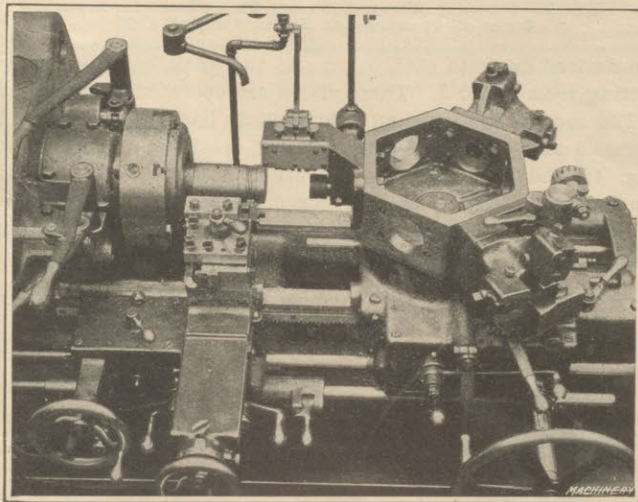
First Chucking on Warner & Swasey Turret Lathe for machining British Forged Shrapnel Shells
